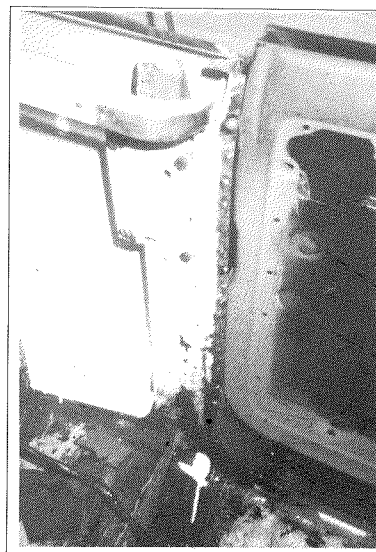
Welds complete and awaiting dressing back flush with the grinder. Note that the door was left on as a general check against the fit of the wing.
